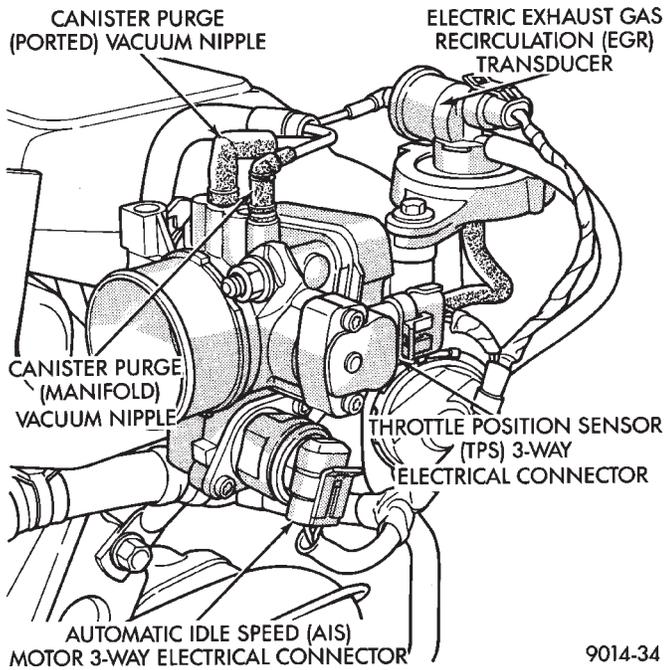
Electrical and Vacuum Connection to Throttle Body
